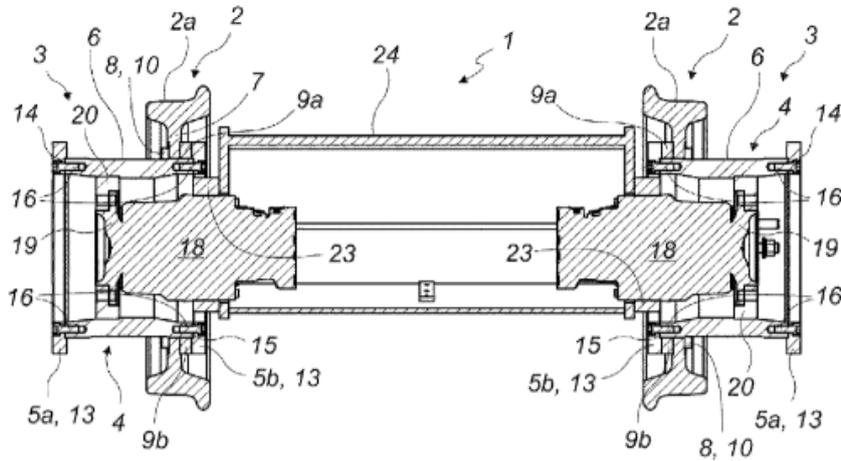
Width adjustable railway axle with two hub motors - cross section view.
